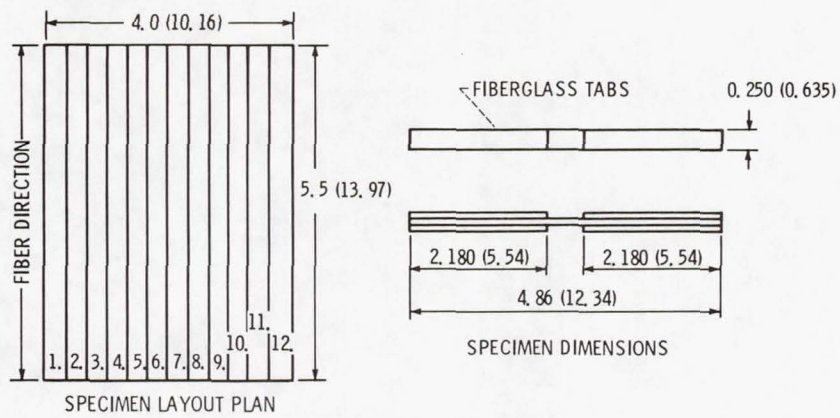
Specimen layout plan and dimensions. (Dimensions in inches(cm).)
